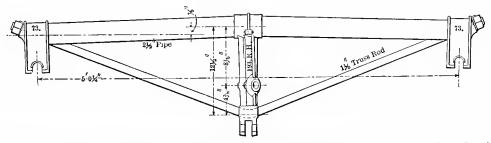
National Hollow 21/2 in. Brake Beam with Rigid Heads for Heavy Freight Service. Chicago Railway Equipment Company.
